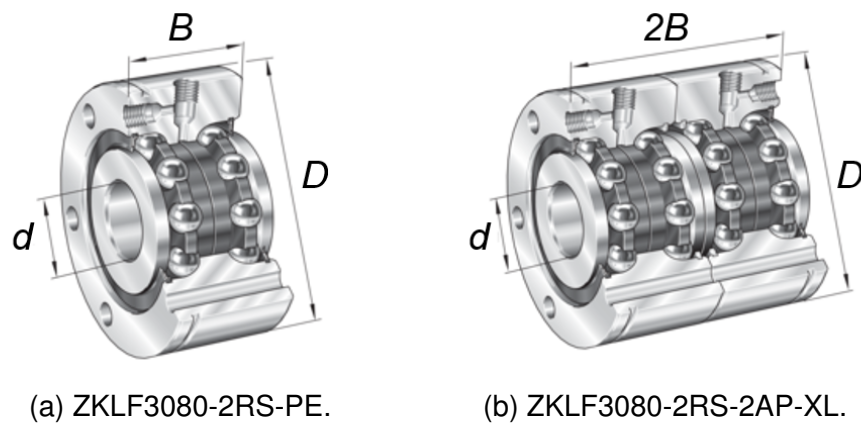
Different Bearing Models on the Fixed Bearing Assembly.
